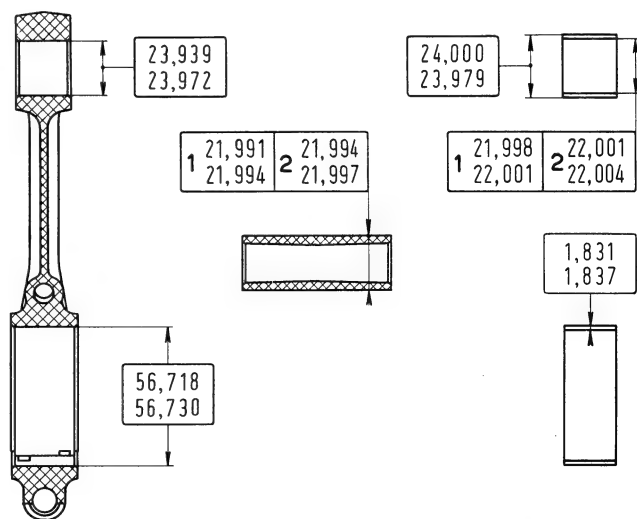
Critical dimensions of 115 C.005 engine connecting rods, small end bushings, rod bearings and piston pins (in mm). (Bushing bore specifications in figure apply to a small end bushing reamed in place).
